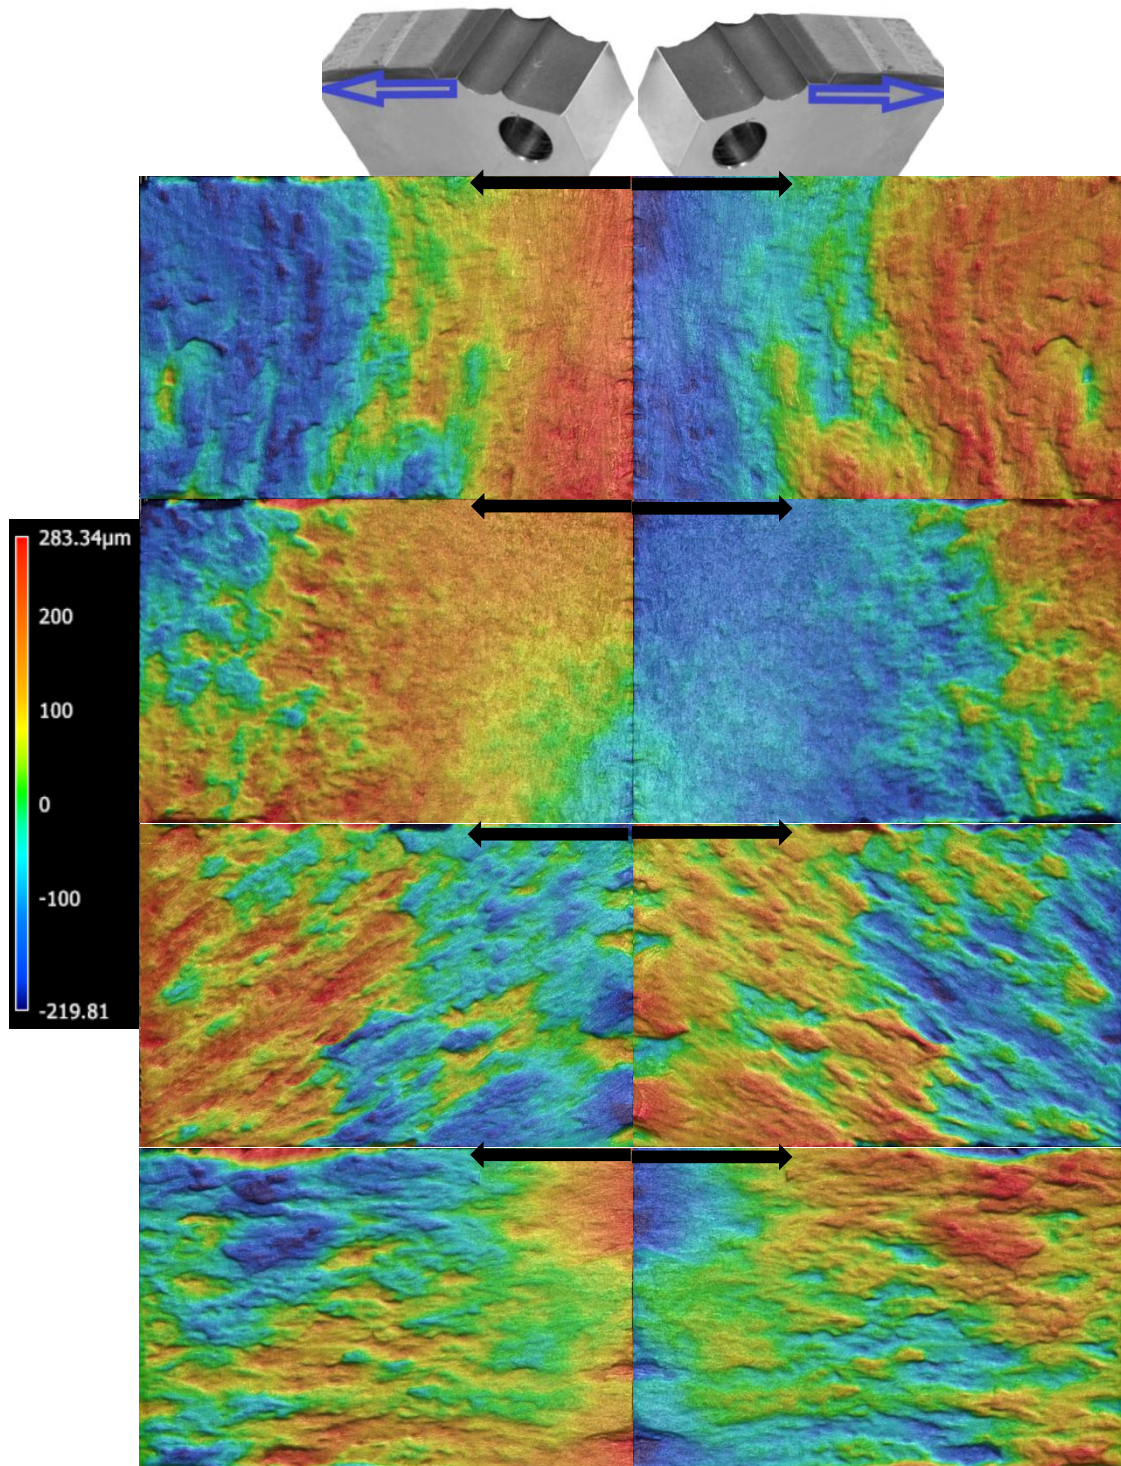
12 mm specimen fracture surfaces (complementary halves side by side) with build orientations (top to bottom) 0, 30, 60, and 90 degrees from FCGR testing
